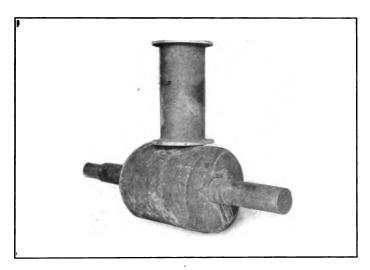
A 12- BY 14-IN. ROLL-SHELL, MOUNTED UPON ITS SHAFT, AND A FLANGED ROLL-SHELL OF THE SAME ORIGINAL SIZE WORN DOWN TO 6.75 IN. IN DIAMETER, ITS SUBFACE BEING MAINTAINED CYLINDRICAL WITHOUT ANY MACHINE-WORK HAVING BEEN EXPENDED UPON IT.
